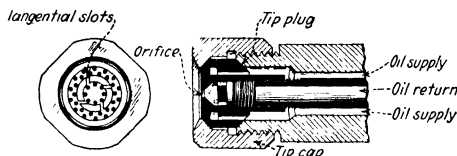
Wide-range mechanical-atomizing oil-burner tip with return oil control. (Peabody Engineering Company.)
